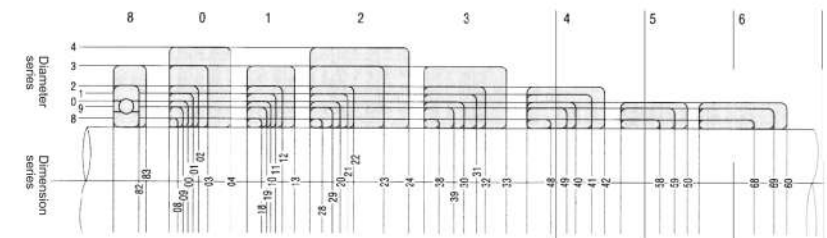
Dimension series of radial bearings (excluding TRB)
